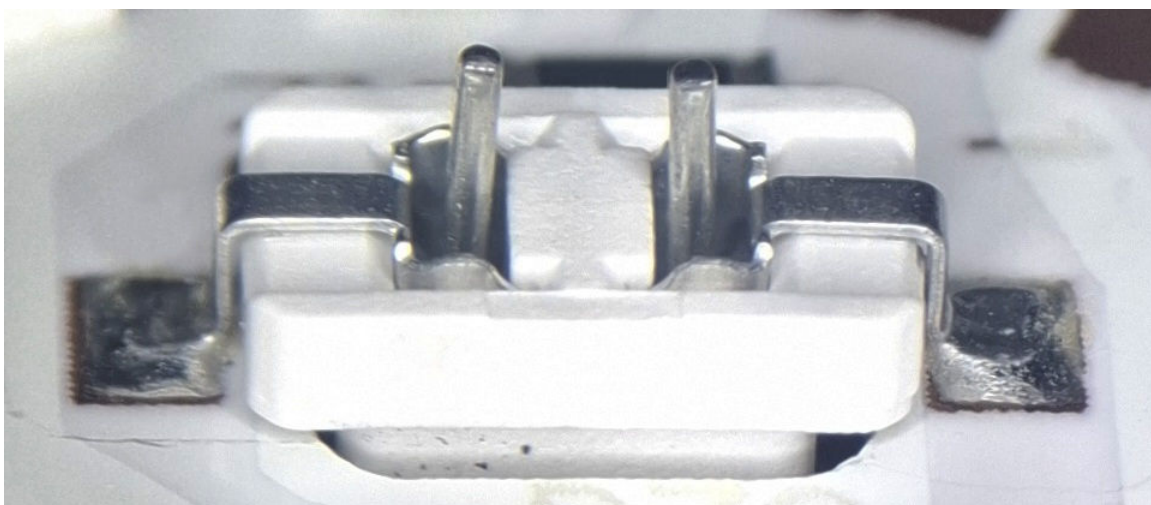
Through-Hole component mounting options: Bottom Entry Connector
